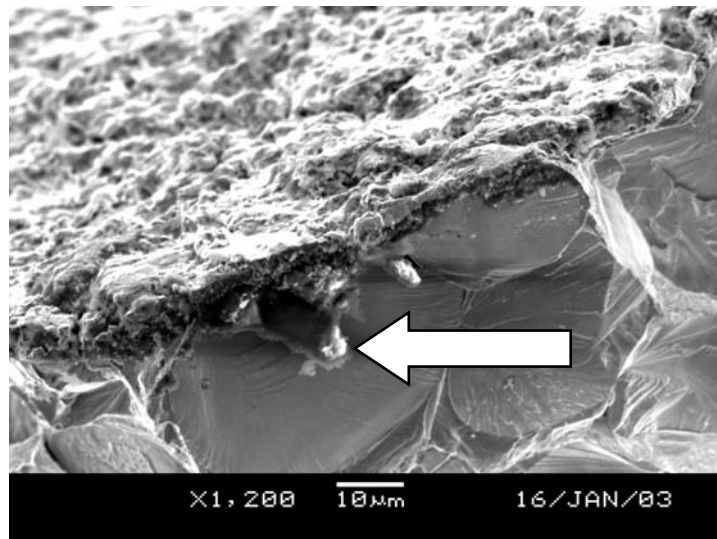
WNiFe Fracture Surface Showing EDM Surface Layer and W Grain Erosion
